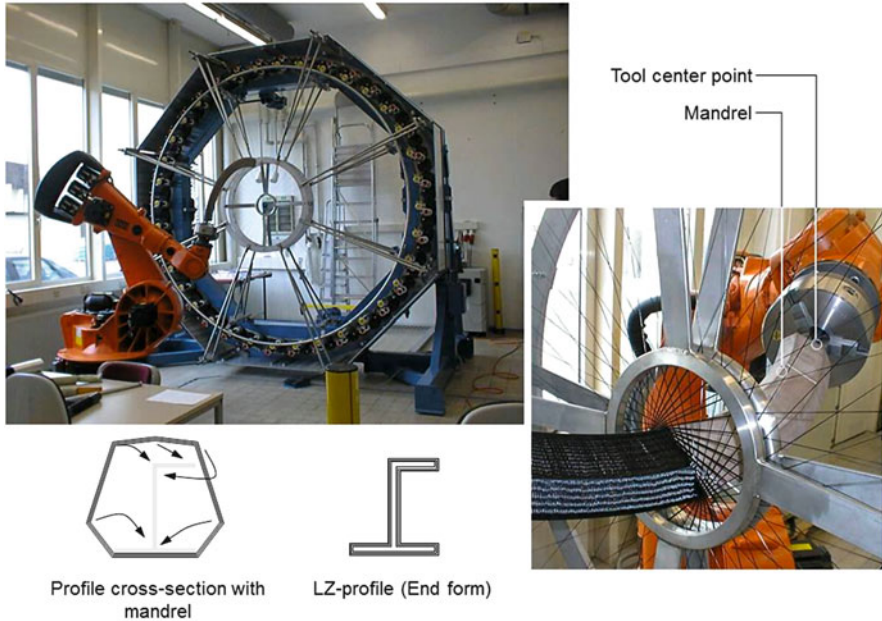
Sleeve braiding machine with mandrel feed (Photos: August Herzog Maschinenfabrik GmbH & Co. KG)
